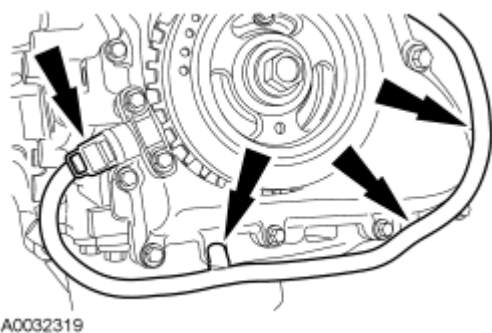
Locating Crankshaft Position Sensor And Wiring Harness Pin-Type Retainers
